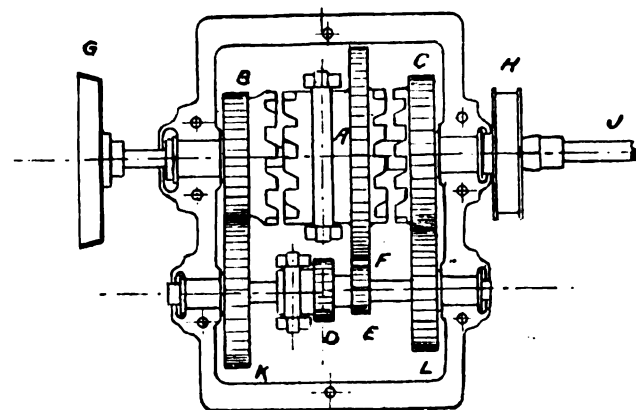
SECTION OF HOZIER COMPANY'S CHANGE SPEED GEAR.
